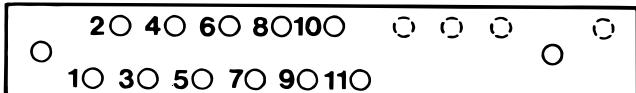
shows the placement of the short flexible hoses which connect to the back section cylinders.
